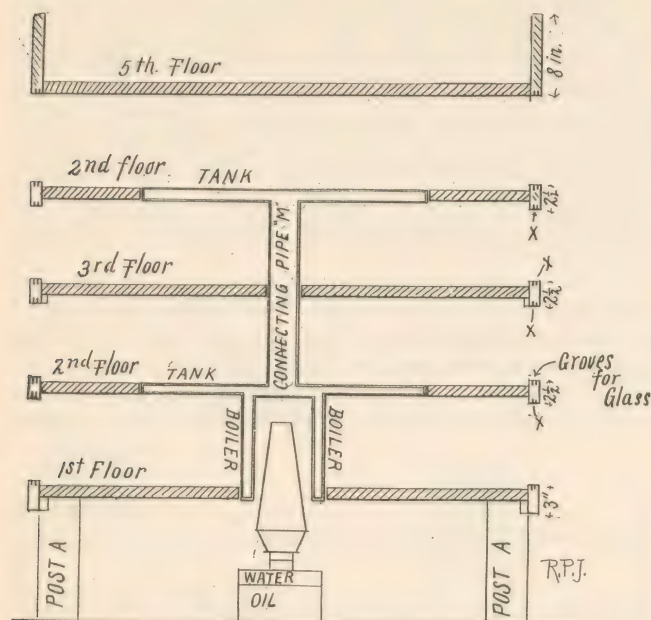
VIEW OF END SECTION OF BROODER SHOWING THE CONSTRUCTION OF BOILERS AND TANKS.
